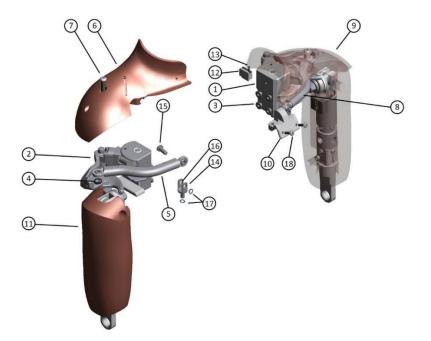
SD3 Shoulder and Arms Assembly Exploded View
